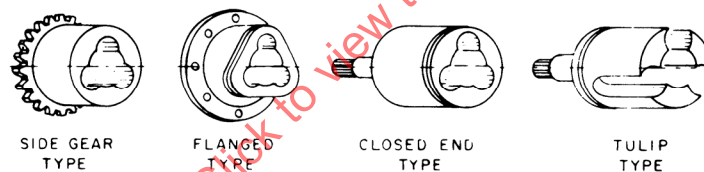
TYPICAL TRIPOT OR TRIPOD JOINT HOUSING CONSTRUCTIONS
